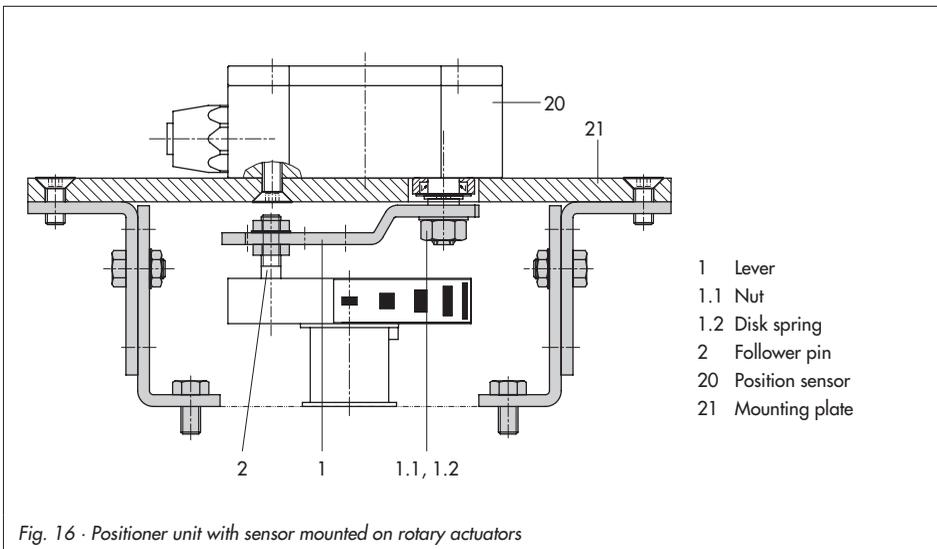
Positioner unit with sensor mounted on rotary actuators
